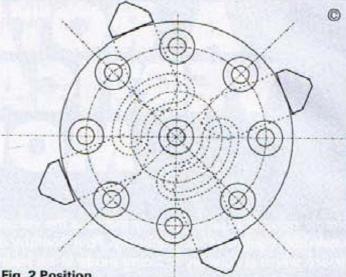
Position of chuck jaws when drilling outer holes. The slots have not yet been milled.
